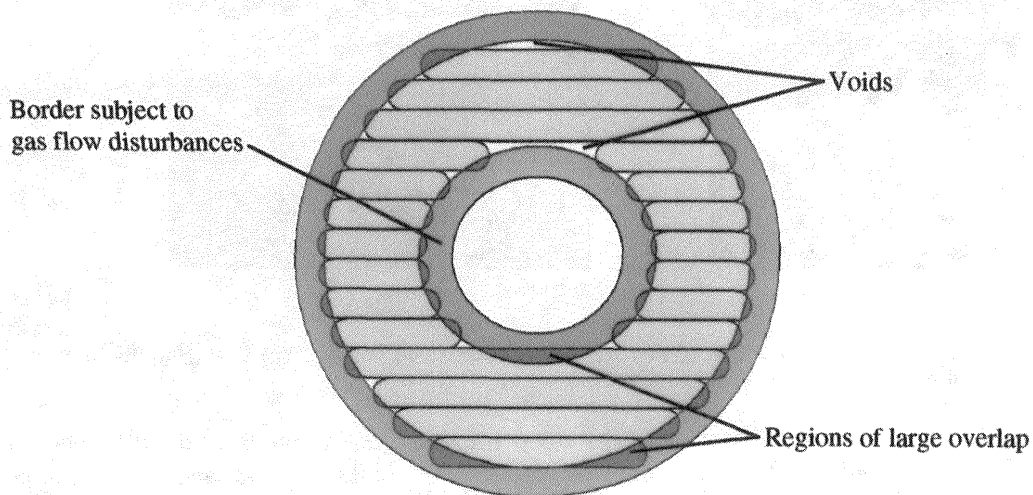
For even basic geometry, many problems may be encountered during a fill pass. Since the width of the weld pool will not always produce weld bead edges aligned with the border geometry, regions of large overlap, and regions with voids may be formed. Further, gas currents blowing back from the part may affect the powder stream, especially in tight areas. If the same fill pattern is repeated, the small disturbances produced by these flaws will build upon themselves, resulting in a poor final product.
